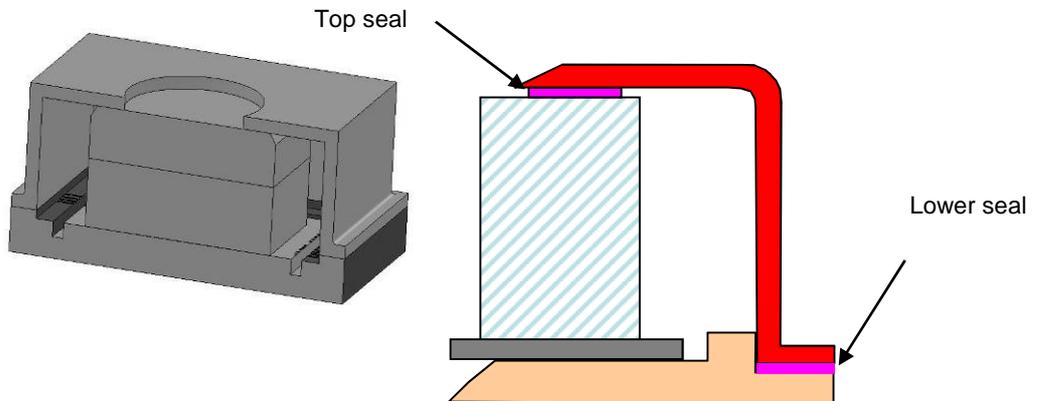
Section through package (left), Top and lower seals (right)
